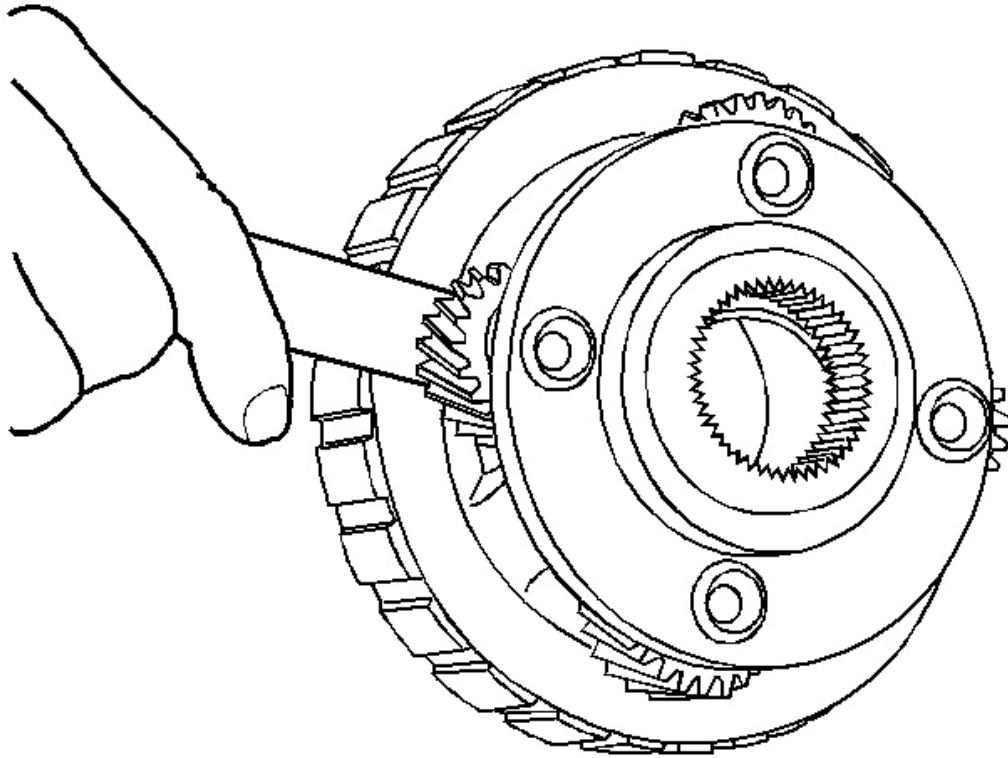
Checking Reaction Carrier Pinion End Play With Feeler Gage
